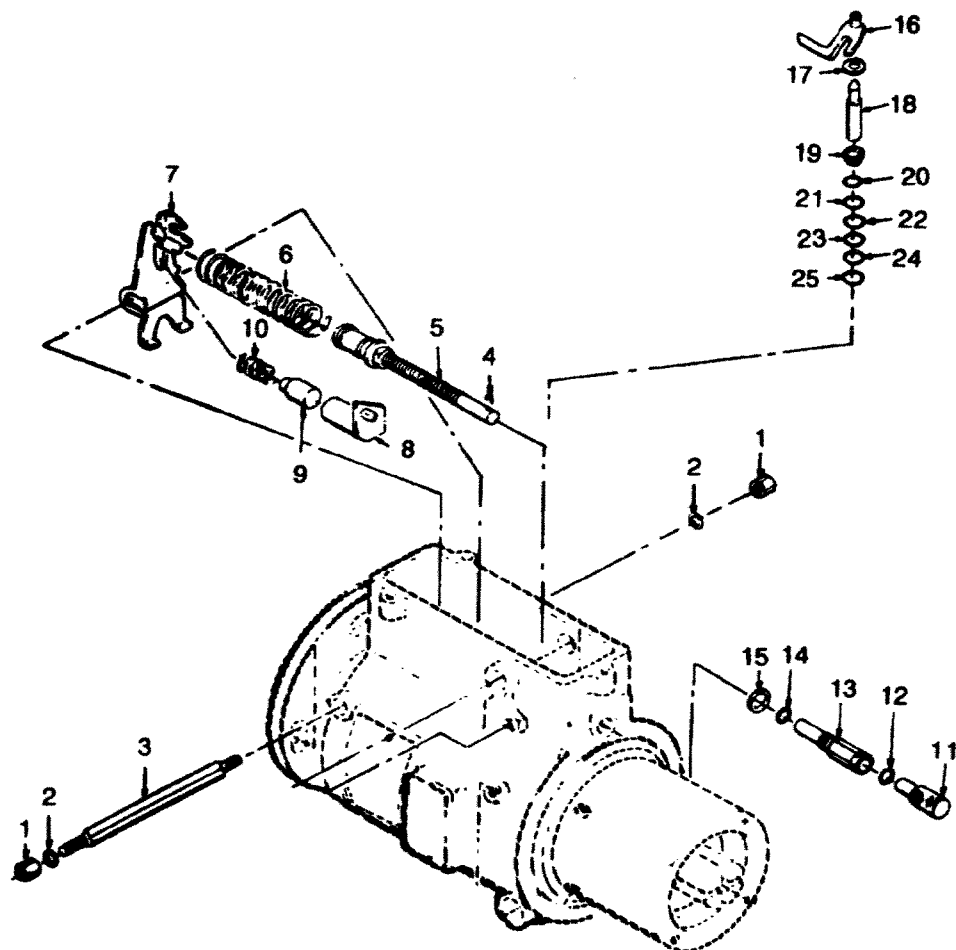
Fuel injection pump, pivot shaft and arm assembly.
